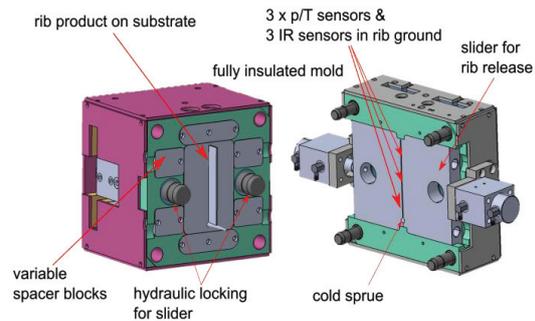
Mold 2 for hybrid rib-substrate manufacturing – left: lower part of the mold, right: upper part of the mold
